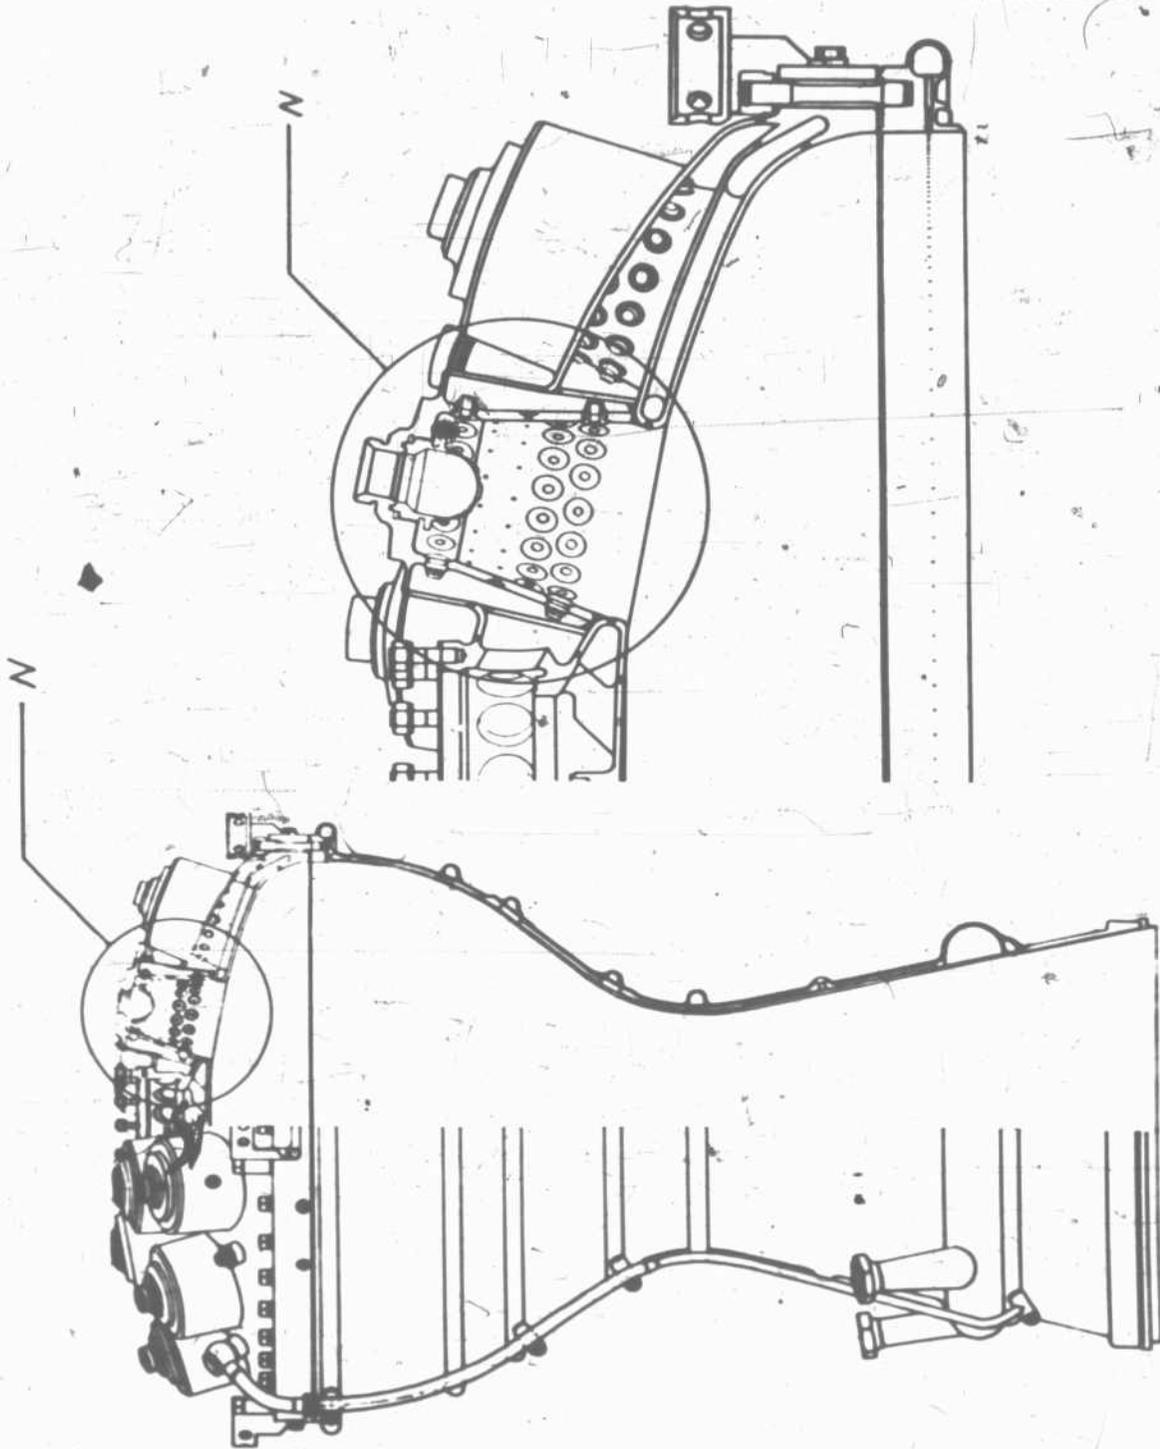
A-4 Chamber Showing Details of Injector Heads
